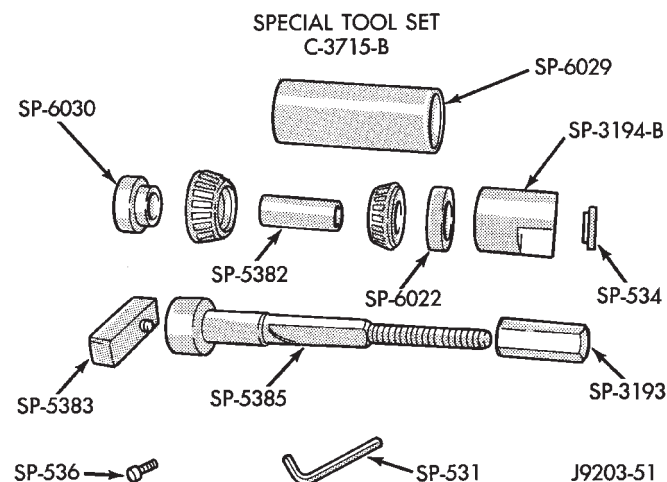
8 1/4 Axle Pinion Adjustment Tools
